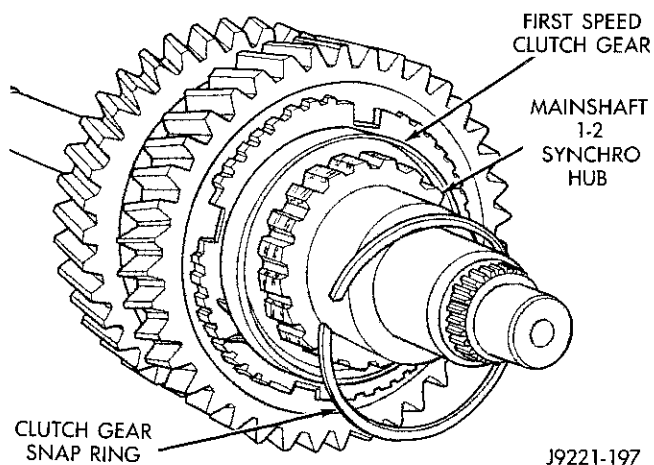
Installing First Speed Clutch Gear Snap Ring
